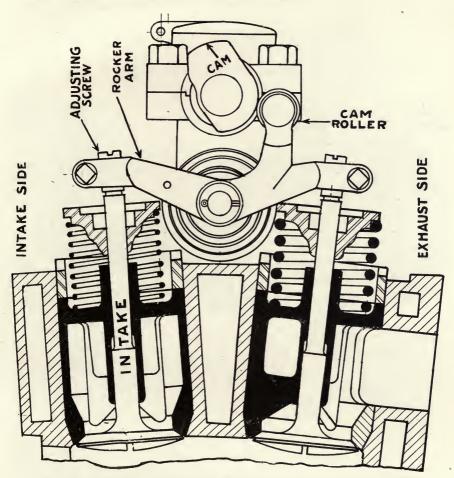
Overhead Type of Valve Mechanism. Valves set at an Angle.
